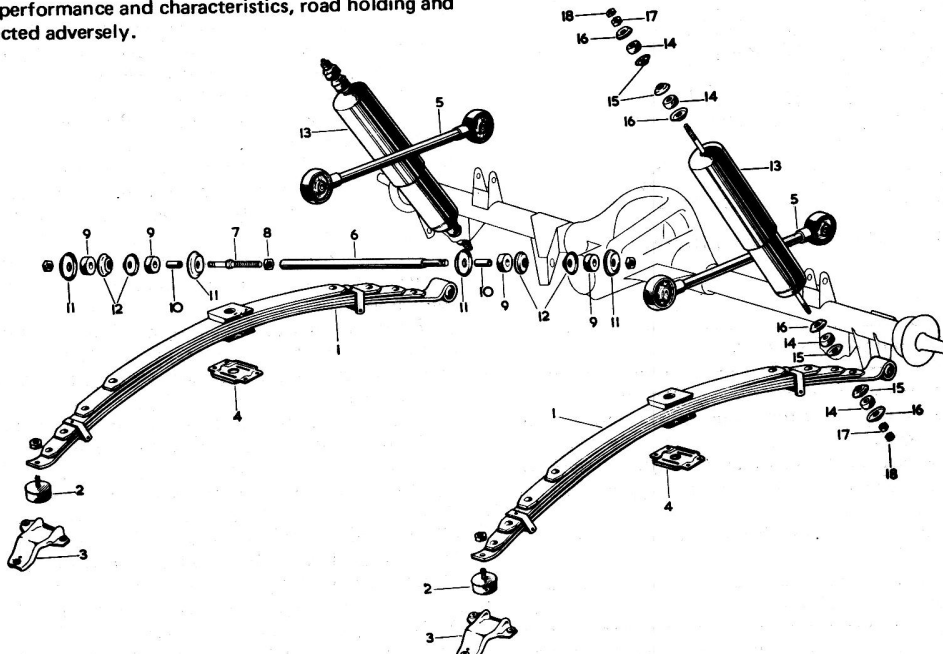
EXPLODED VIEW OF THE REAR SUSPENSION
